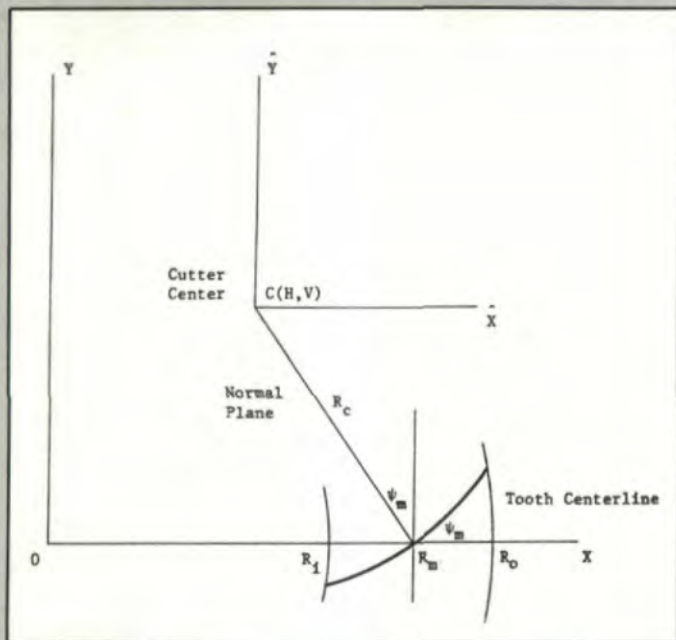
View of Pitch Plane and Tooth Centerline of Crown Gear
